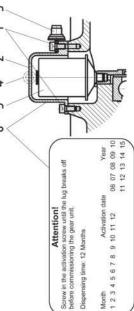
Activating the automatic lubricant dispenser with standard motor mounting
